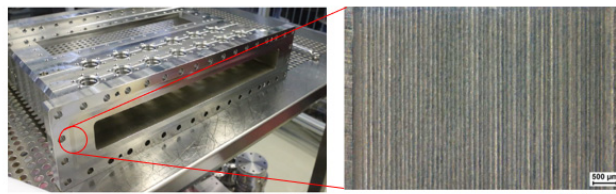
A large flange vacuum chamber with the grooves. The zoom shows a high magnification photo of one of the first test pieces.
